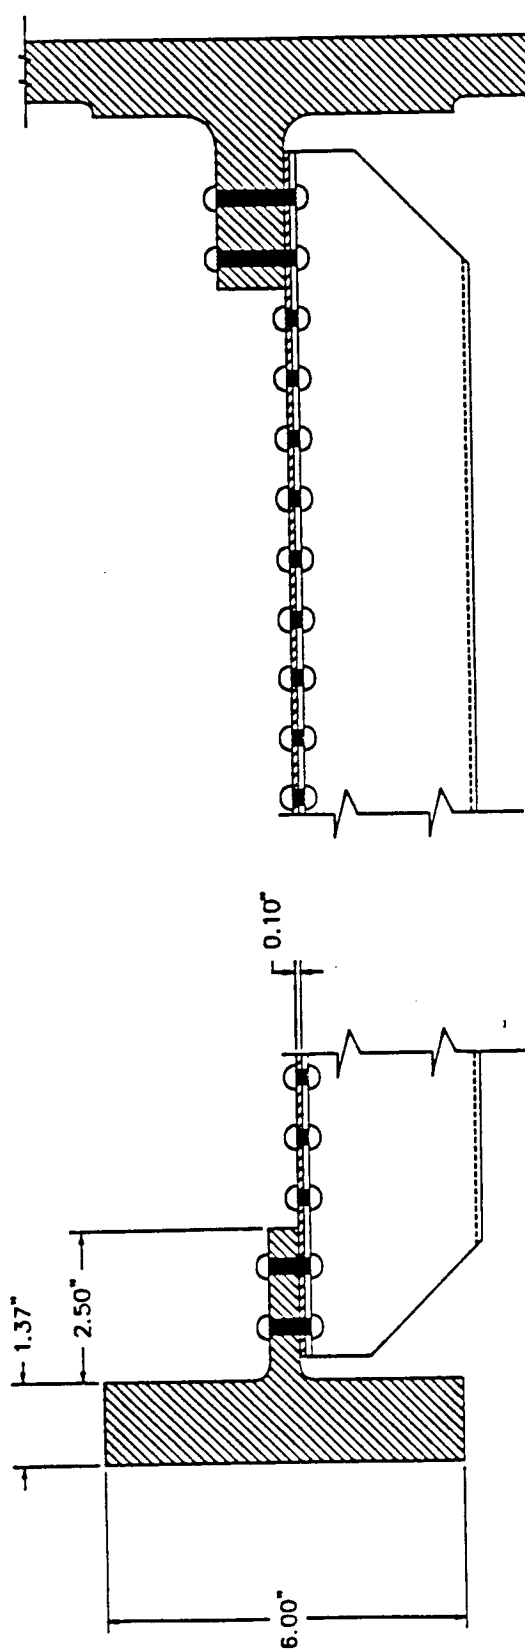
Forward ET Attachment Assembly (Front View)
